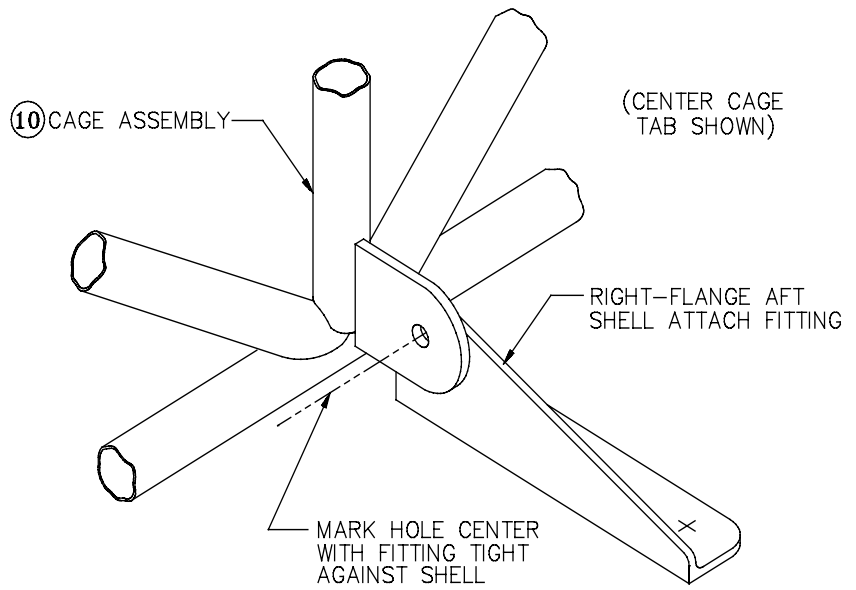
Drilling the Cage Attach Bolt Holes in the Aft Fittings
